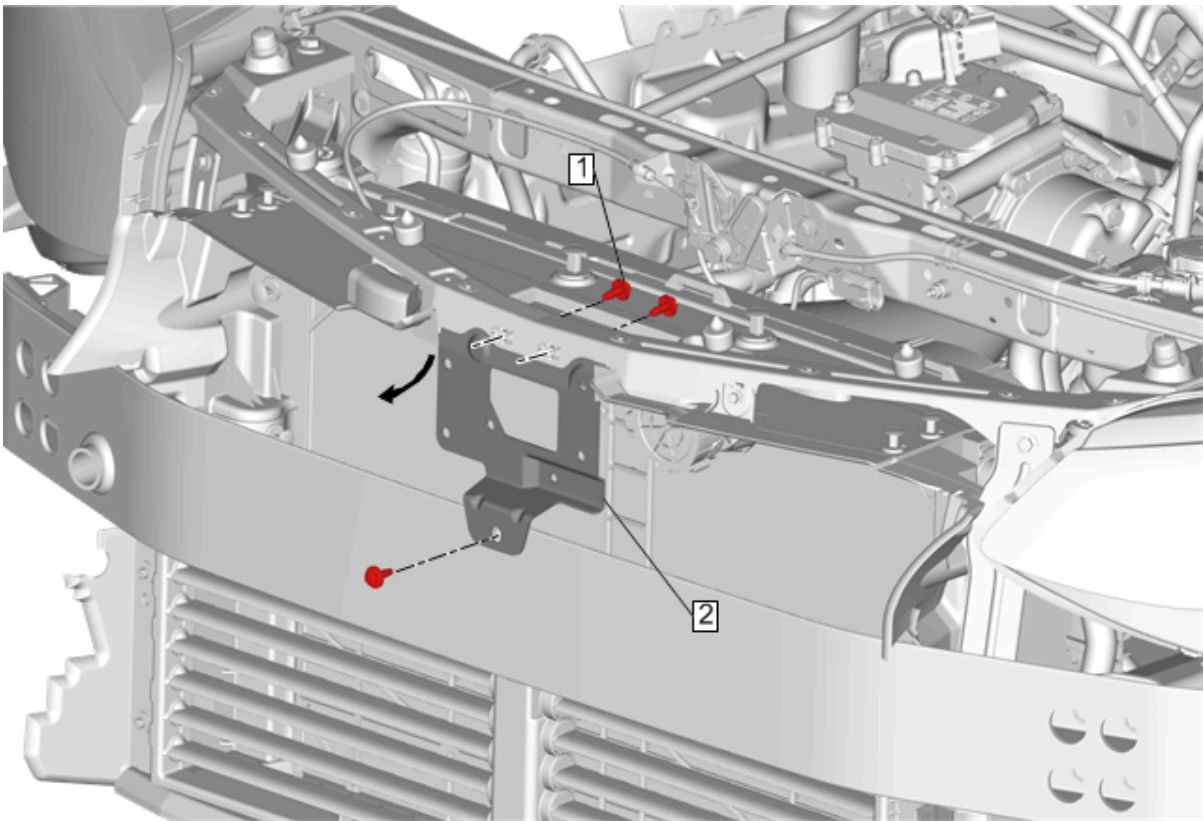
Front Bumper Fascia Lower Stiffener (Center)
